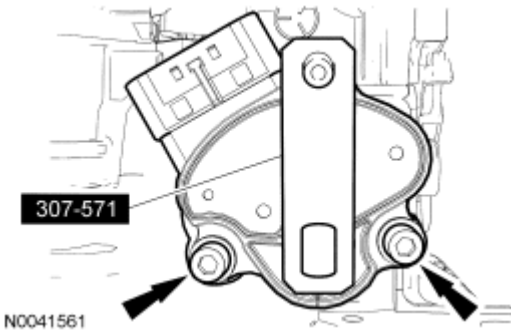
Identifying Special Tool (307-571) And TR Sensor Bolts
